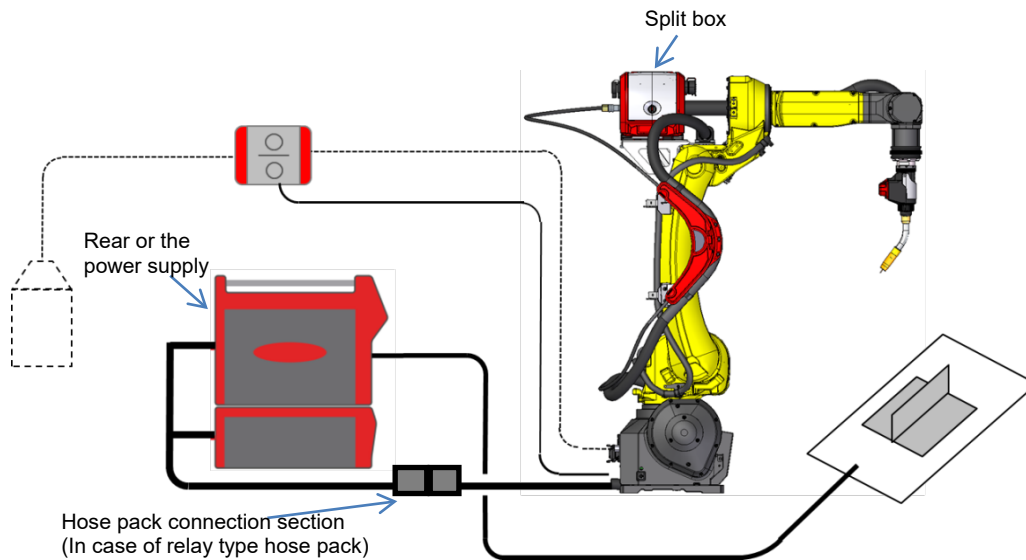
(c) Check points of the welding power cable connector
